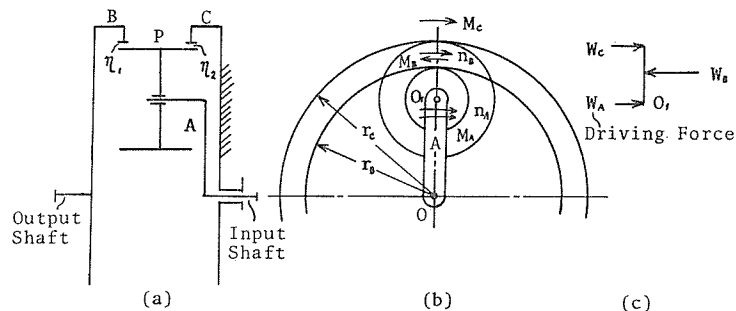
2K Type Planetary Gear applying the Mechanical Paradox Internal Gear
